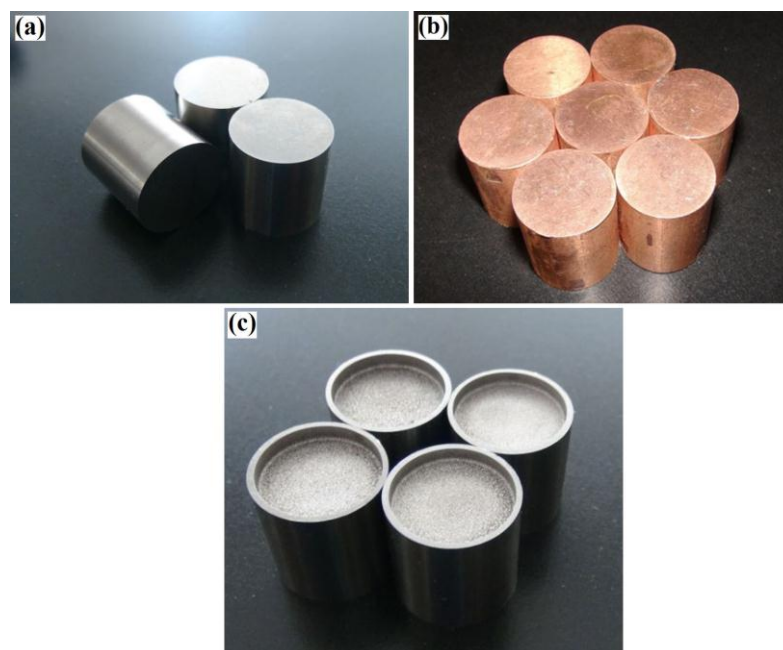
(a) The workpieces before EDM, (b) copper electrodes and (c) final productions.
